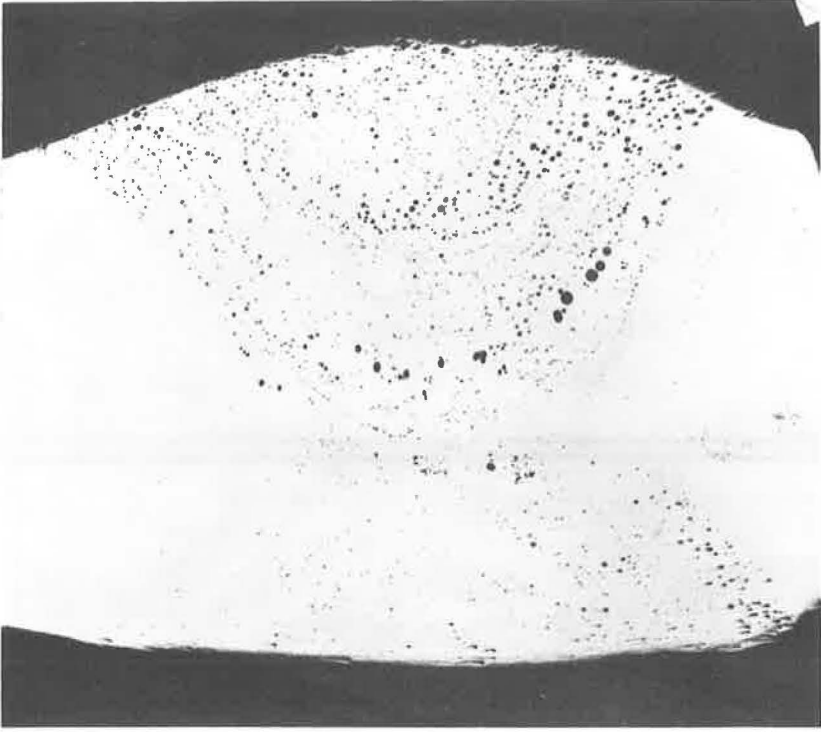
Macrograph showing porosity in a TIG weld in  $\frac{1}{2}$ -in. 2219-T87 plate (S-278462, mag. 5X, as-polished).
